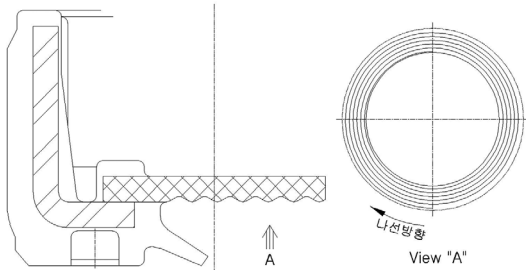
Design of PTFE seal for the front part in the automotive engine
